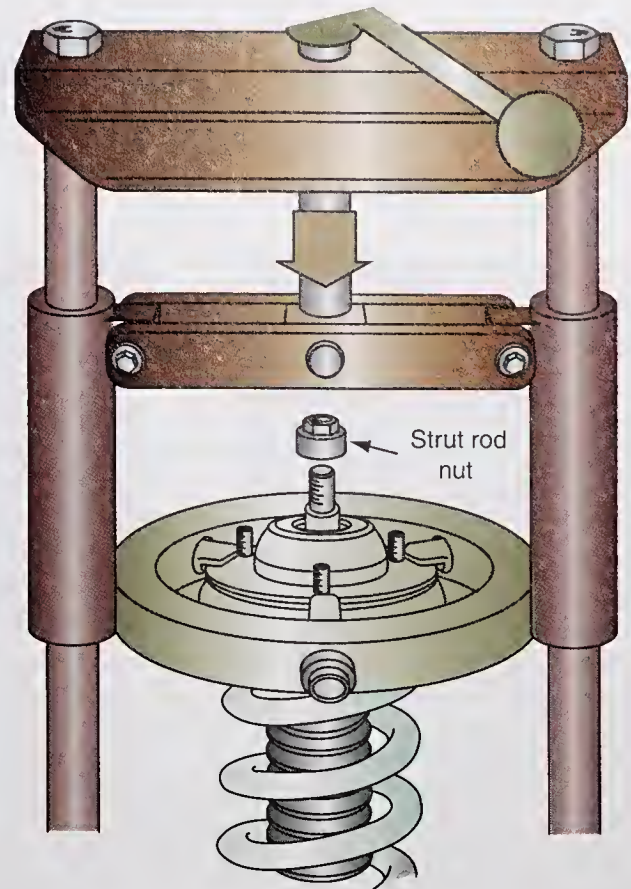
A spring compressing tool is used to compress the coil spring.
